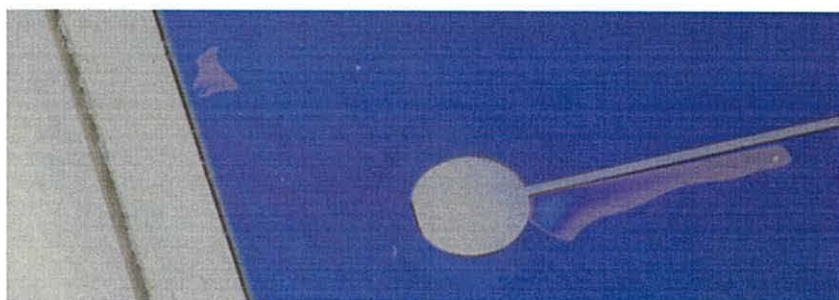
Channel structure fabricated through laser machining of dry film laminate.
